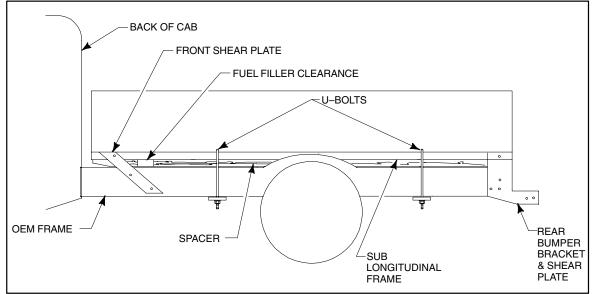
FIGURE C - SUPER DUTY F-SERIES SUB MOUNTING TECHNIQUE #3
